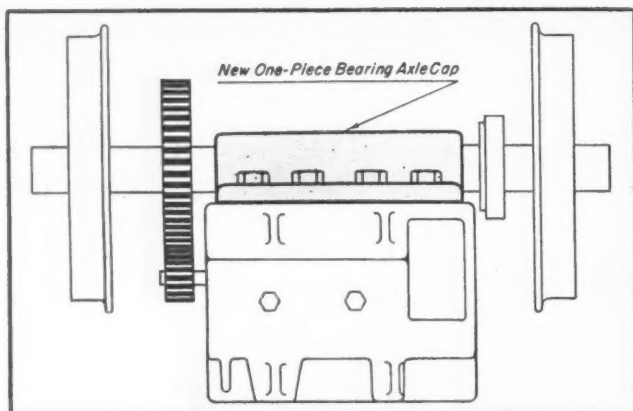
ONE PIECE axle-bearing cap provides an extremely rigid mounting that resists loosening and the resulting misalignment that destroys pinions, gears, bearings and often the complete motor. It has a machined-in key for the full length of the cap on both the top and bottom mating surfaces and additional cap screws also add to the rigidity of the assembly.
